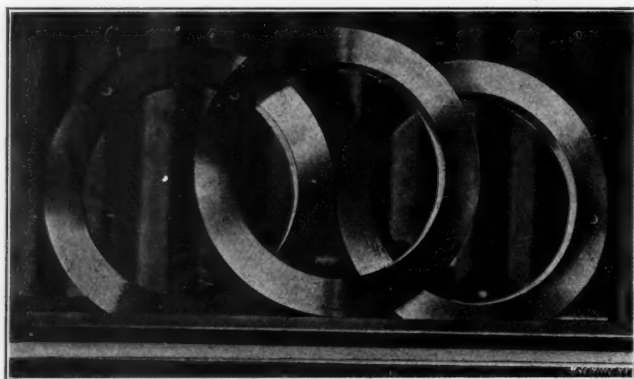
Thrust Bearing Rings, 8 inches in Diameter, shown being ground in Fig. 7
